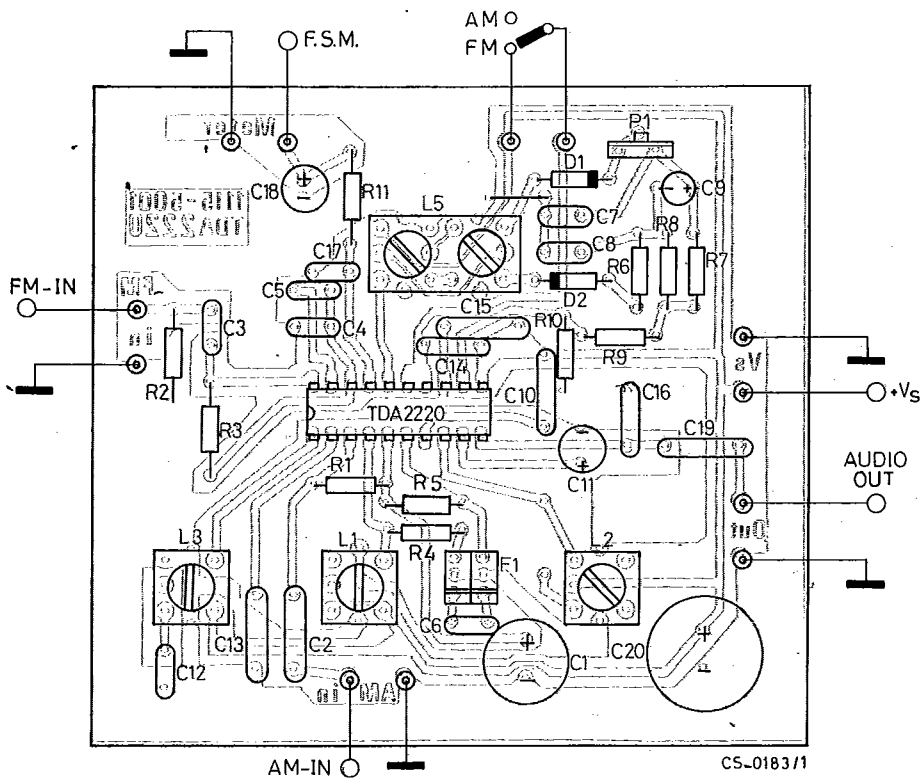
P.C. board and component layout of the circuit of fig. 1 (1:1 scale)
